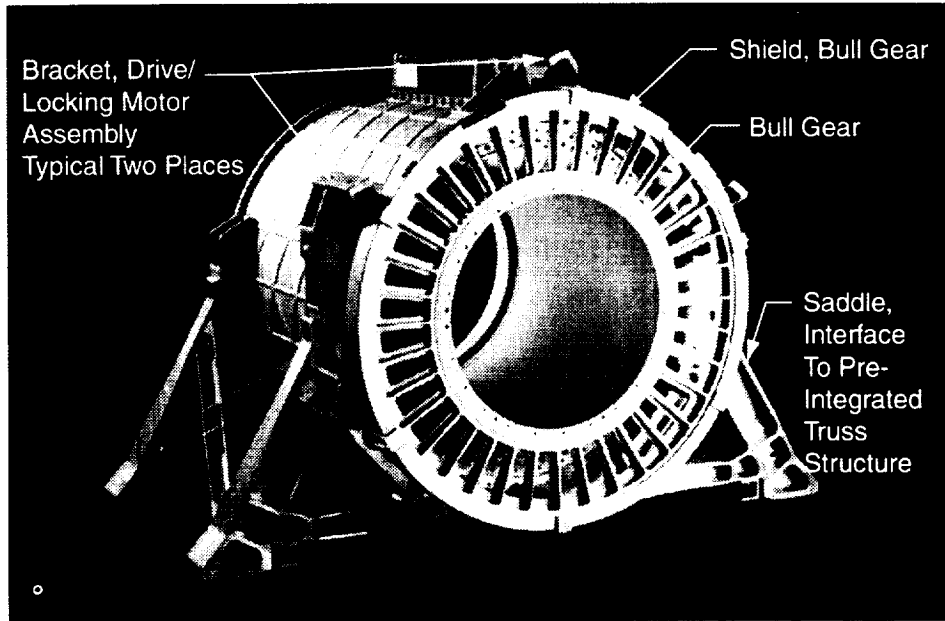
Bearing Assembly, Thermal Radiator Rotary Joint (TRRJ)
